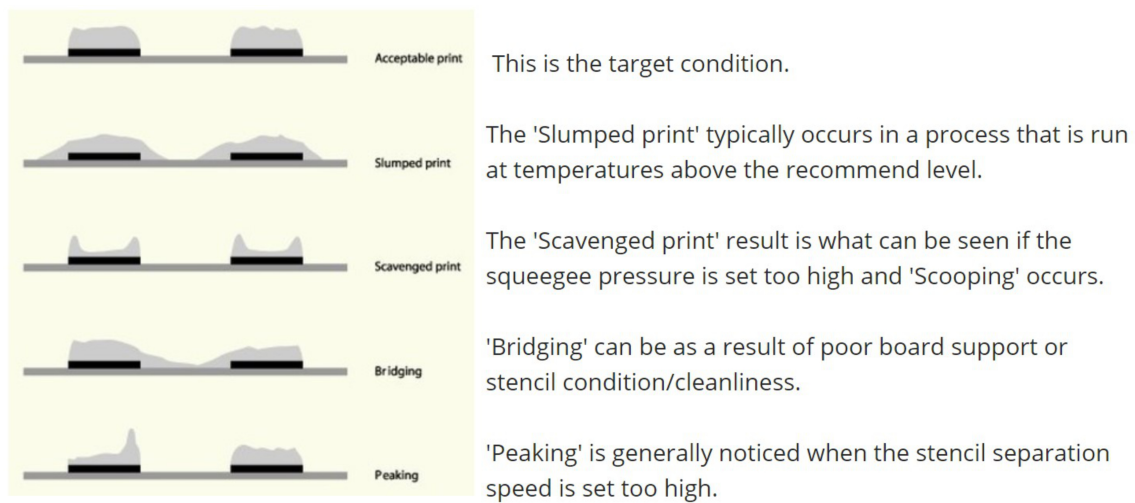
Common solder paste printing defects (Surface Mount Process, 2020a).
